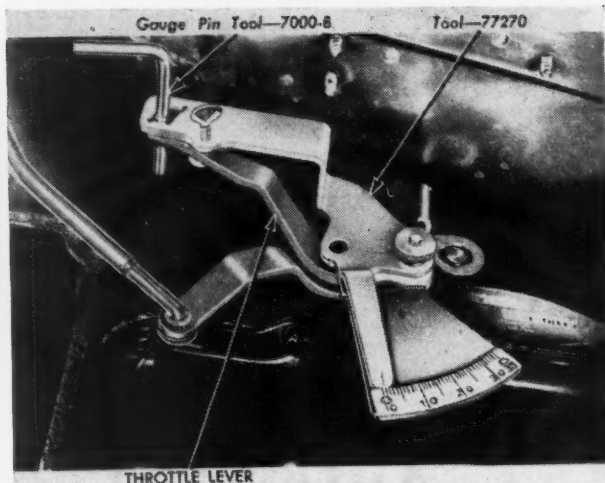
Protractor gage in position over the throttle lever shaft locating the large elongated hole.
